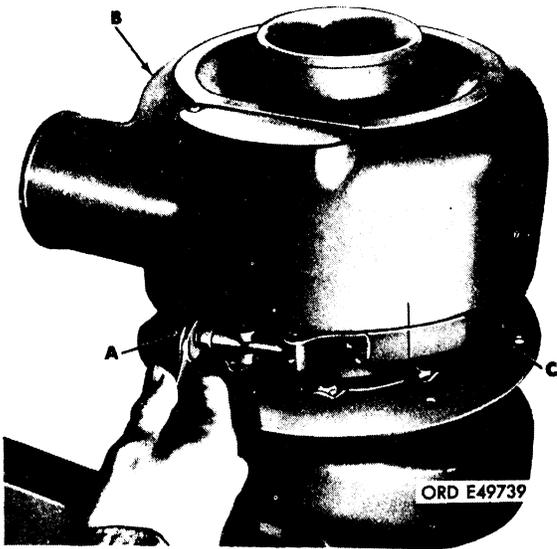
REMOVING OR INSTALLING COMPRESSOR COVER - TURBOCHARGERS 10935279, 10912638, AND 53591-C-139552
